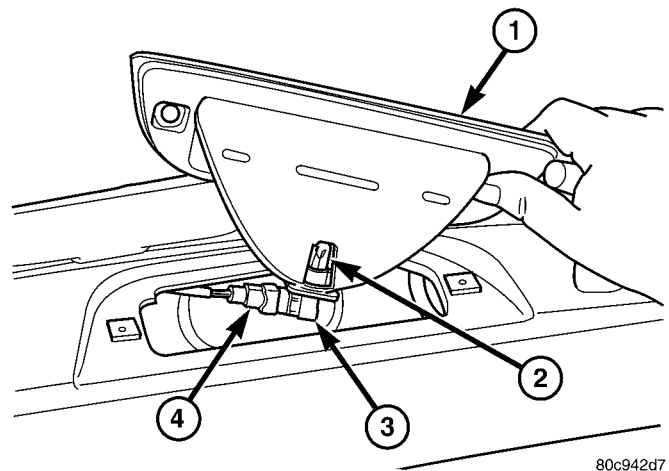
Center High Mounted Stop Lamp Bulb Remove/Install
